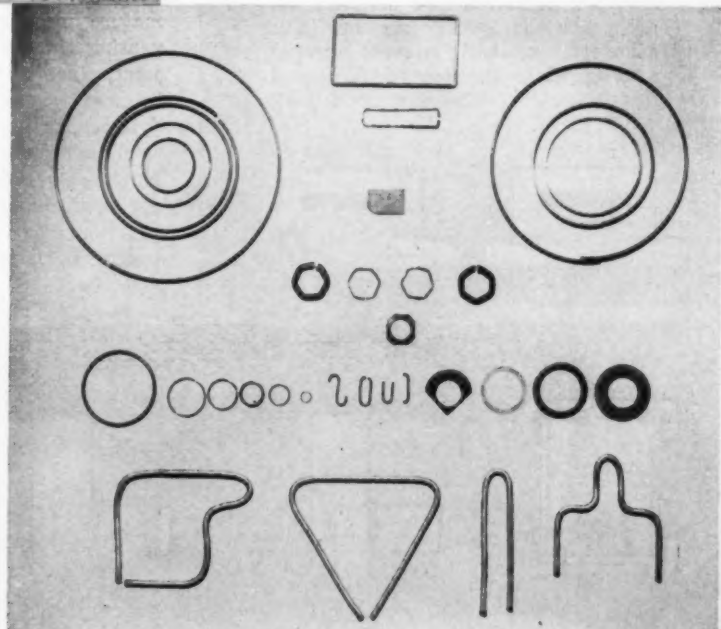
Above—When filler metal is preplaced, the face of a brazed joint may be either exposed or concealed. However, it is desirable to design the joint so that it can be inspected for complete filling after brazing. Placement of filler metal so that flow will be aided by gravity is desirable
